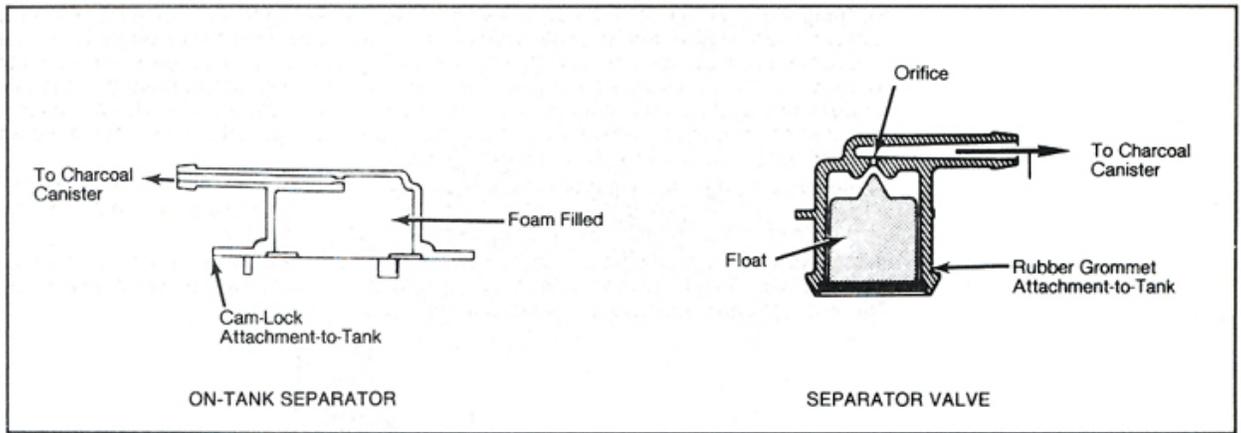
On-Tank Separator & Vapor Separator Valve
